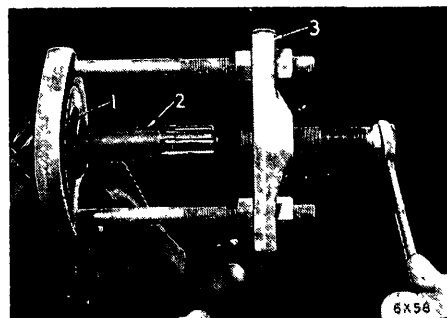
Removing drive pinion rear bearing, 1935-52. 1. Bearing 2. Pinion shaft 3. Puller
